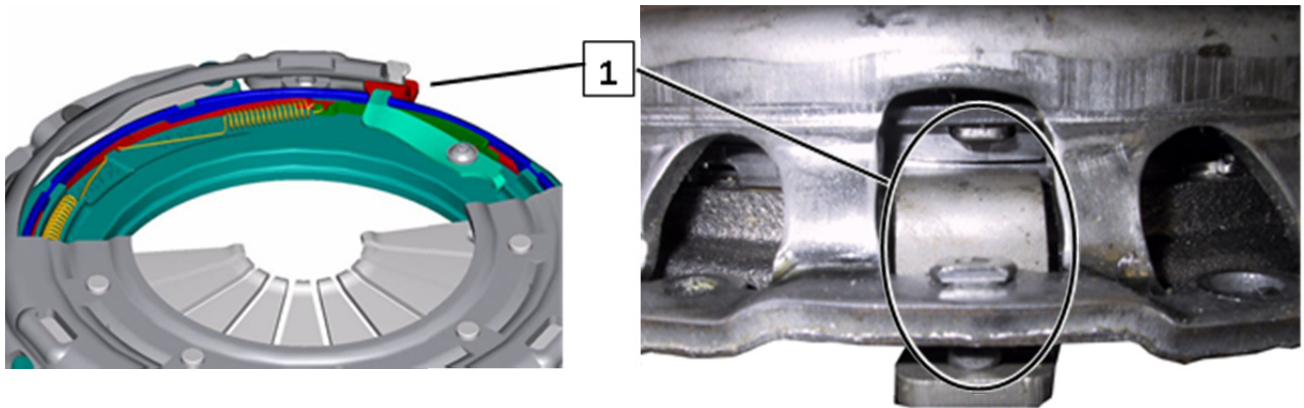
The housing stop is not fixed in the delivery condition. When screwing the clutch pressure plate onto the flywheel the catch is locked and is fixed thereafter.
